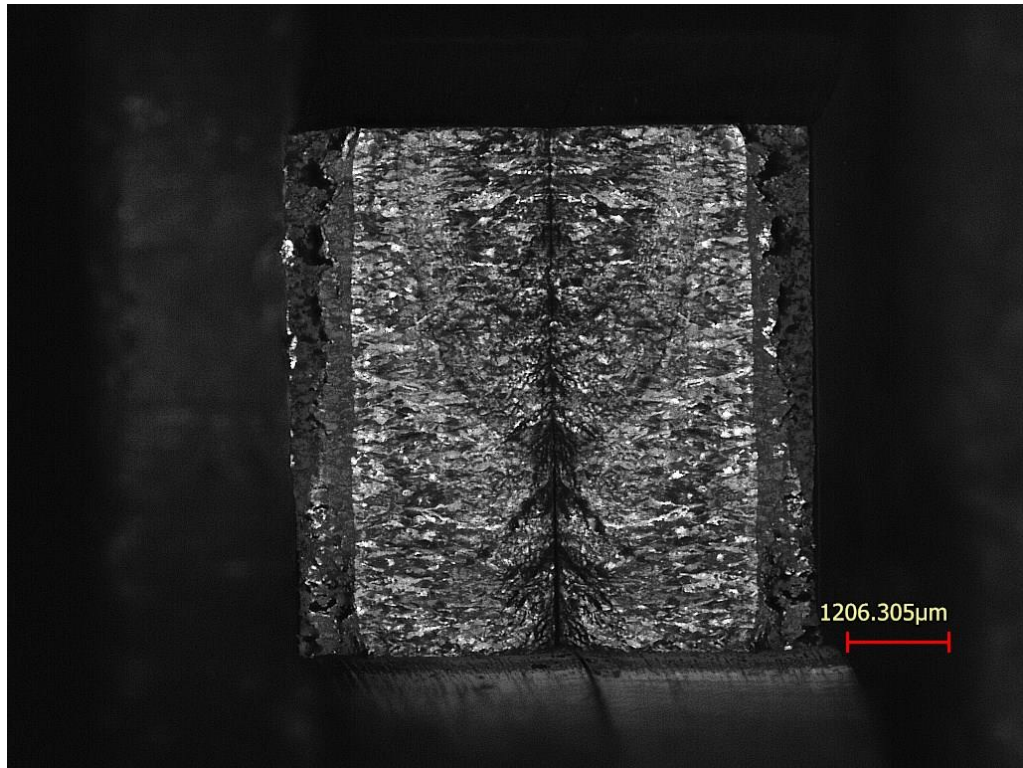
Specimen AS fracture surface (3,000,000 cycles : 55.35 ksi / 381.6 MPa)
